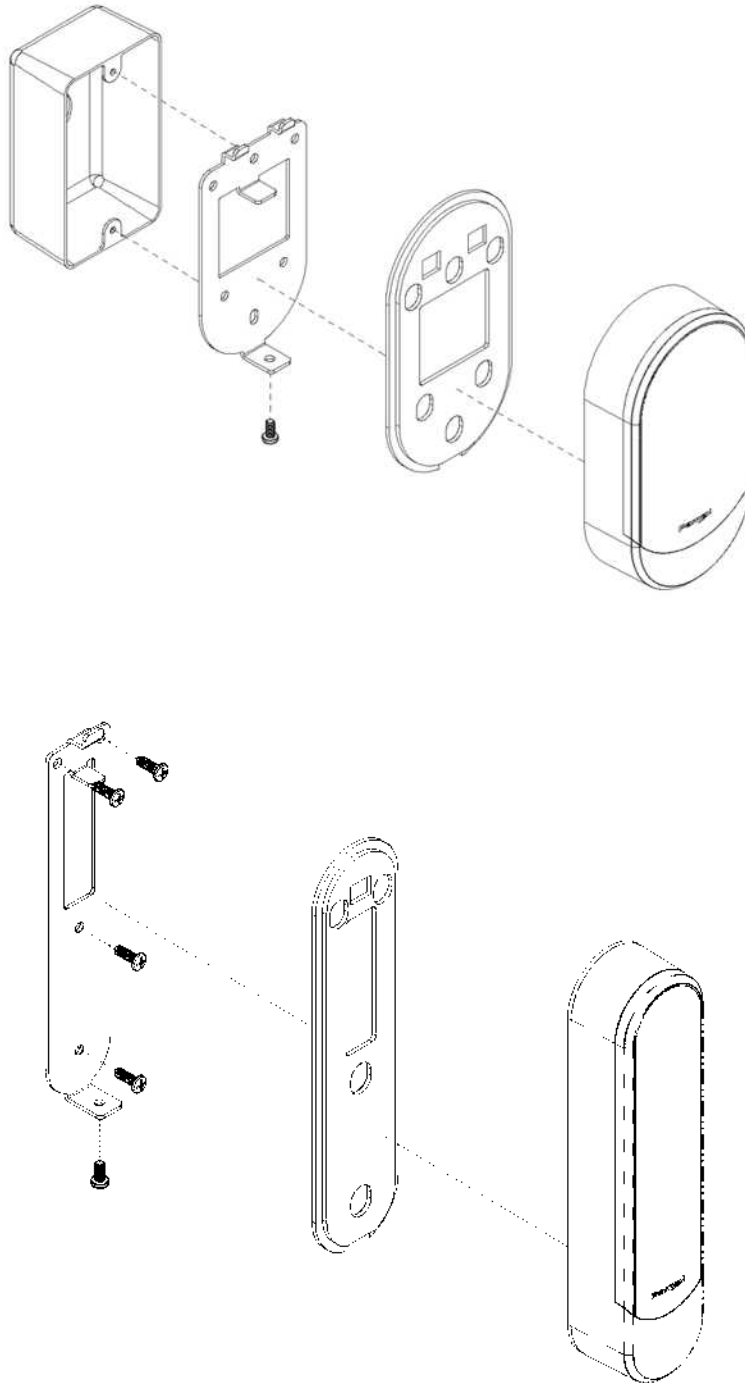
Kapture KA-WR1S(N) MOUNTING TO SINGLE GANG RECESSED OUTLET BOX
